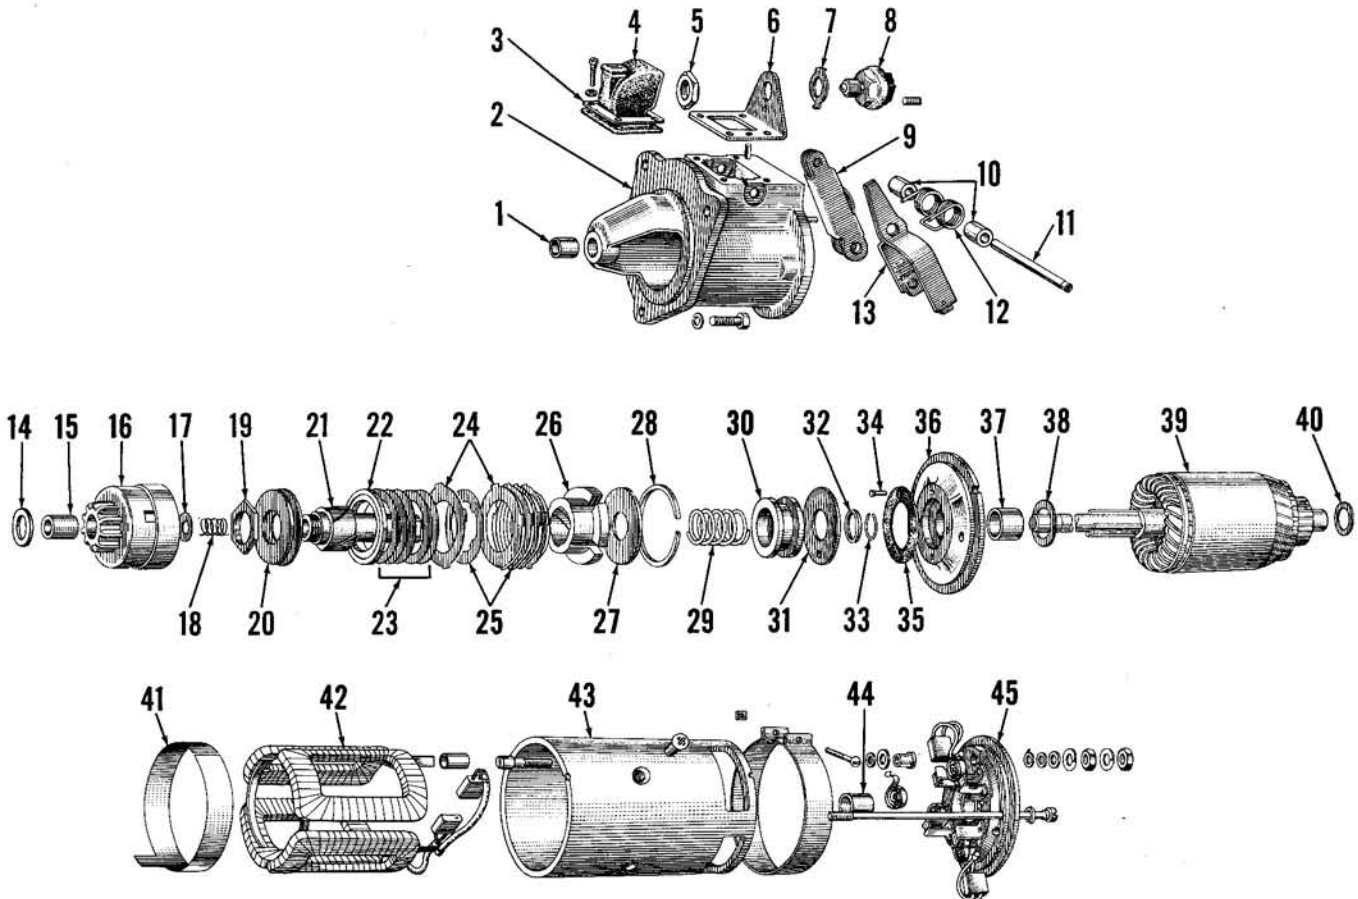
Exploded view of starting motor assembly as used on all models. Refer also to Figs. 103 and 104.
